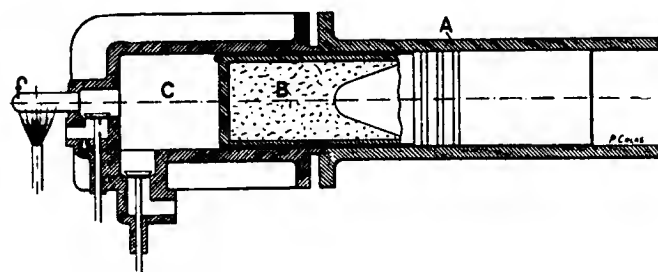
Section of early Daimler, showing tube ignition, patented in 1884.
